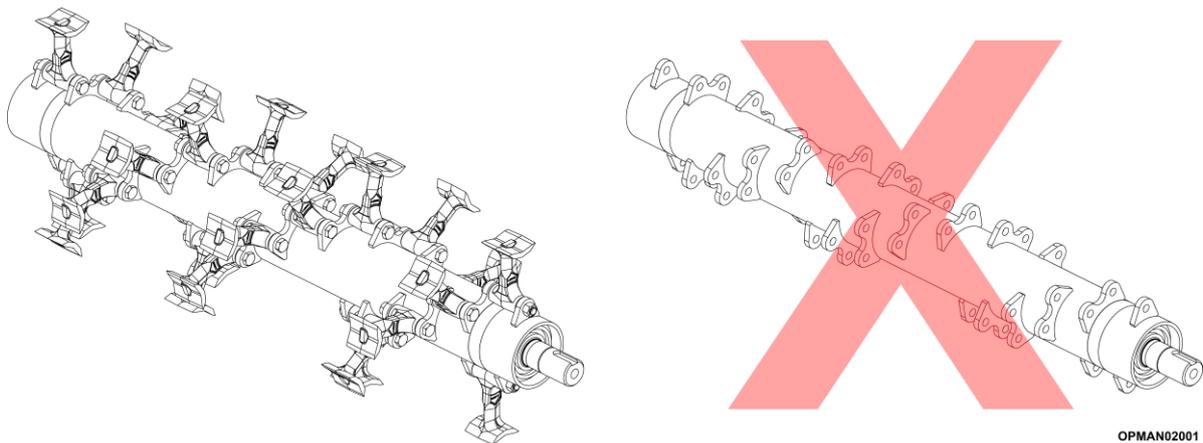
Spearhead Only Supply Complete Flail Rotor With Flails
